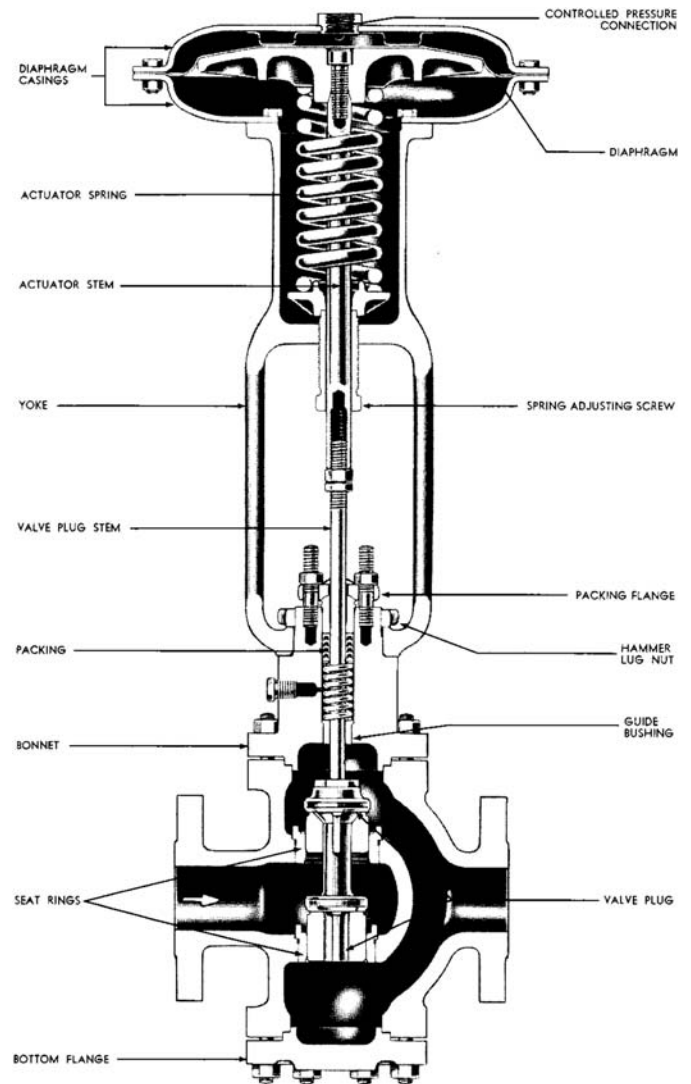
Valve actuator. Courtesy of Fisher Controls.
